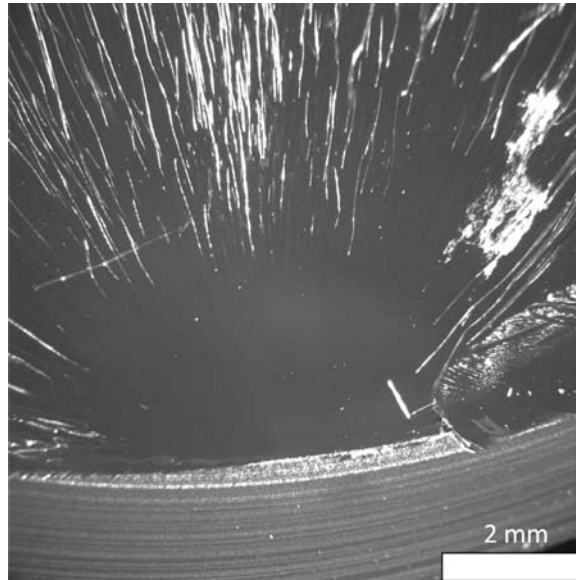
Images showing the fracture surface of GB3-7.
